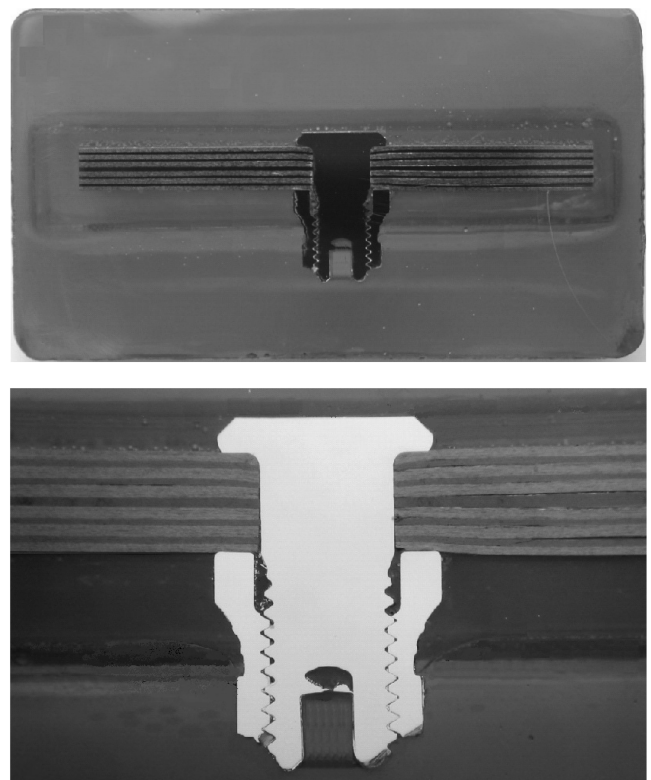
Mounted and polished filled-hole specimen after lightning strike.
